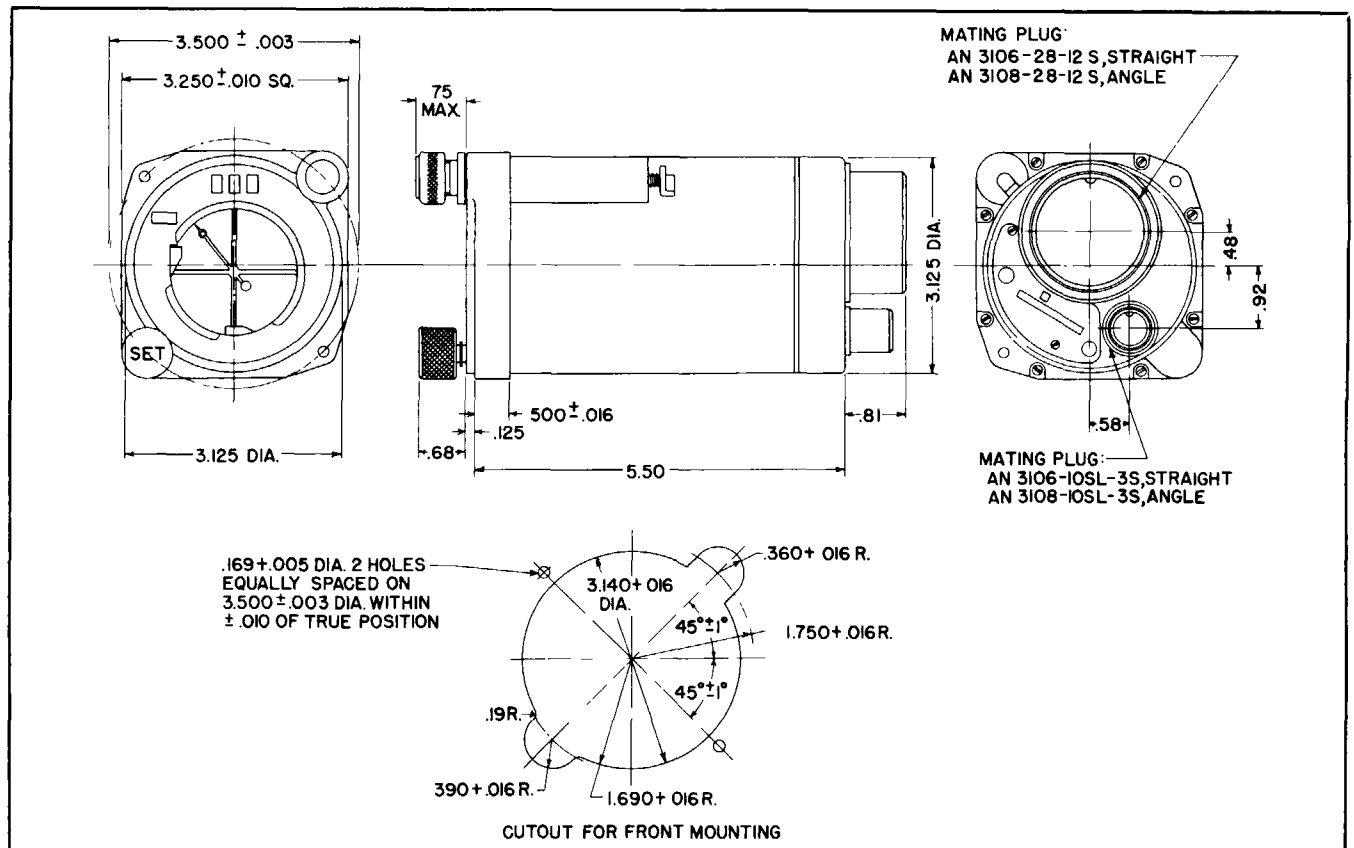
A. Course Indicator ID-249A/ARN, Outline and Mounting Dimensions
